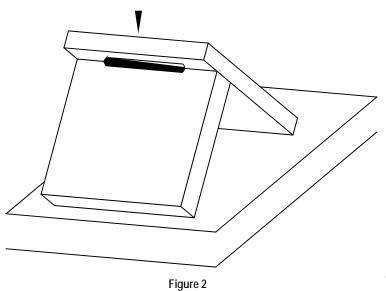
Miscellaneous Qualification—Fillet Weld Break Specimen
